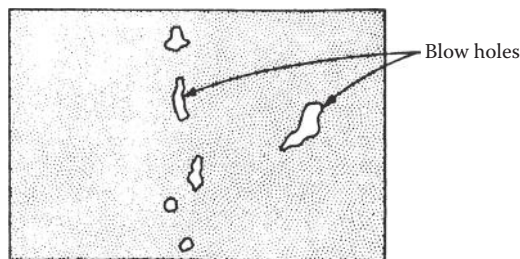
Schematic X-ray absorption photograph of a mechanical weld.
